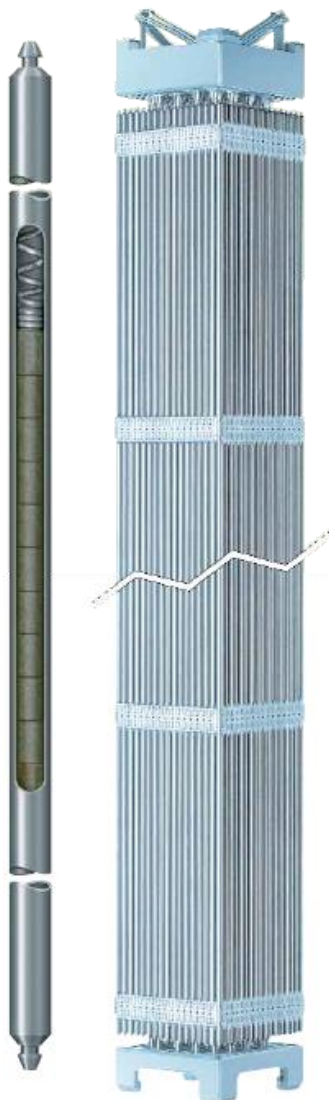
Fuel rod and 17x17 FA scheme.
